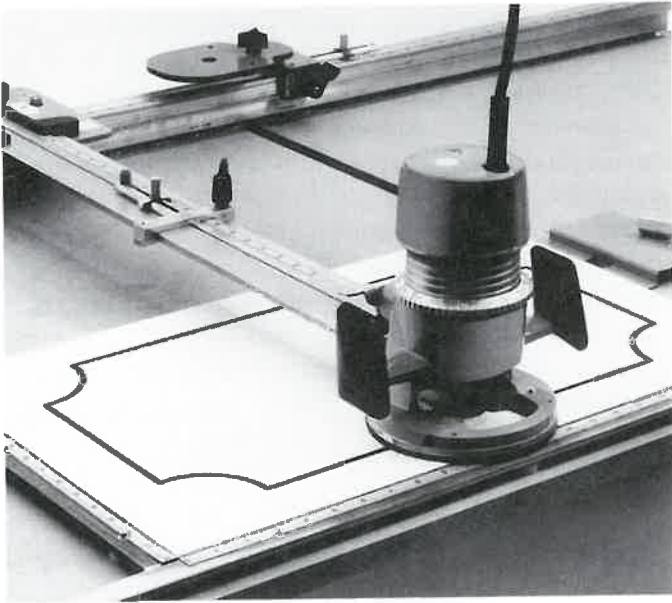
This jig reproduces cabinet door designs. (Bosch)
